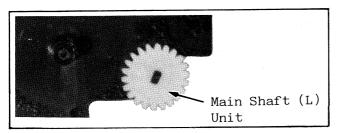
Adjustment of Cassette Up Gears-(8)
